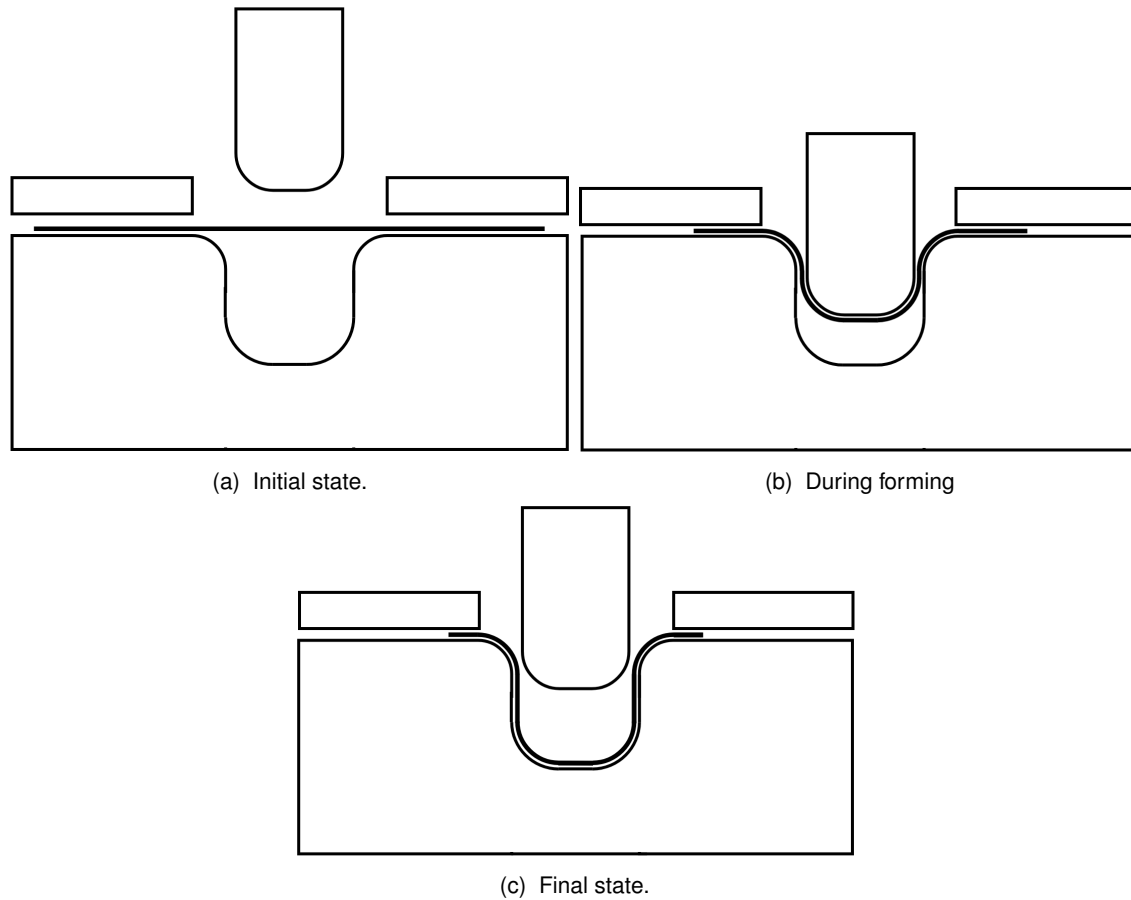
Schematic of a deep drawing process. Initially (top left), the blank is placed on the die before it is fixed by the blankholder while the punch is brought in contact with the blank. The punch then deforms the blank into the desired shape (top right) and moves back up (bottom).
